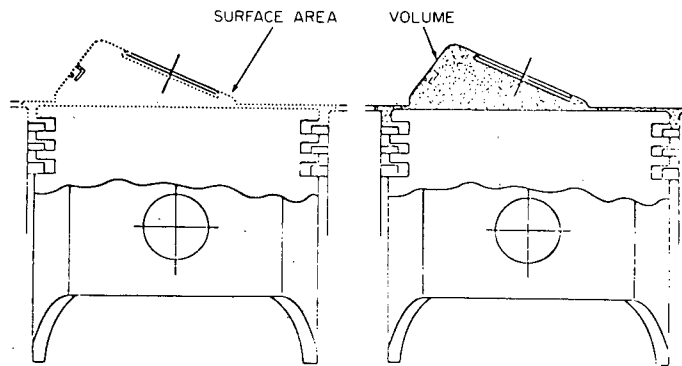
TYPICAL COMBUSTION CHAMBER
